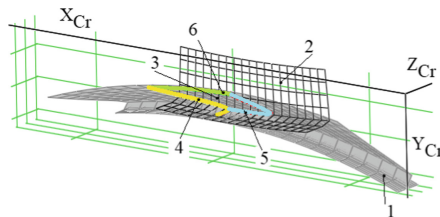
Contact spot of the cutter tooth and the crankshaft neck.
